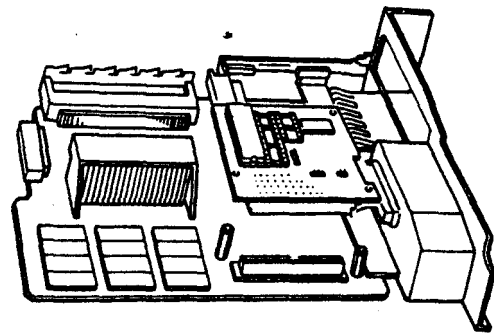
Removing the PCL5/RITech Upgrade Board
